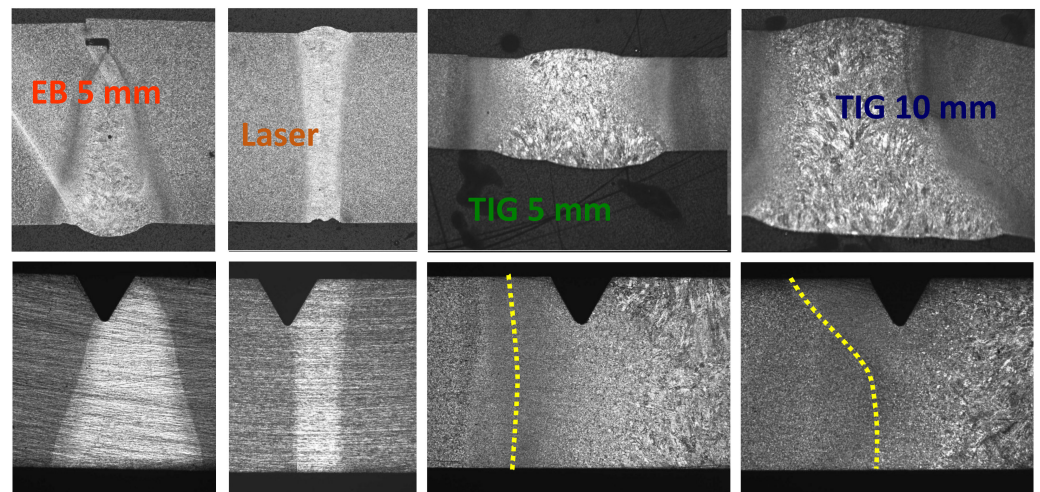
(Upper row) Cross-sections of 5 mm electron beam (EB) weld with beam stopper, 5 mm laser weld with beam stopper, 5 mm and 10 mm $\frac{1}{2}$ -V tungsten inert gas (TIG) weld; (lower row) the alignment of the notch of the Charpy specimens in the heat affected zone (HAZ). The dotted lines indicate the course of the softest area within the HAZ in the TIG welds.
